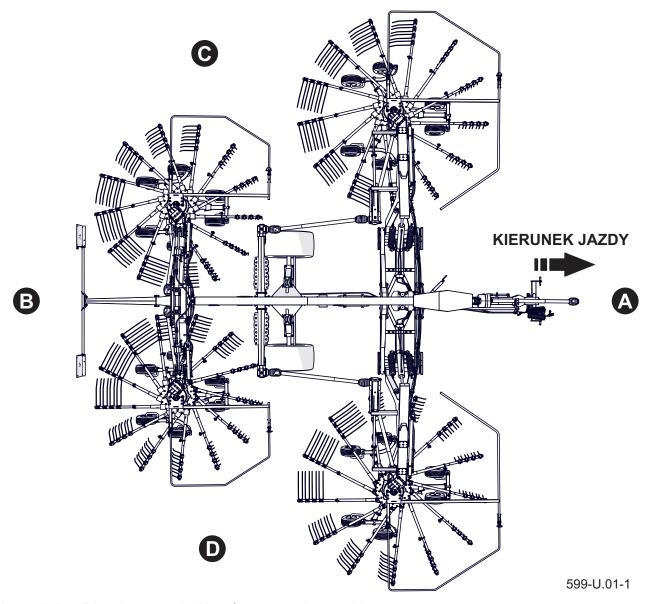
Directions used with reference to the machine (A) front, - (B) rear, - (C) left side, - (D) right side
